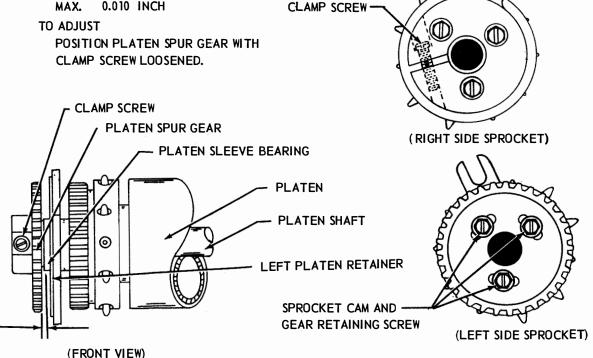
TYPING UNIT, SPROCKET FEED PLATEN
